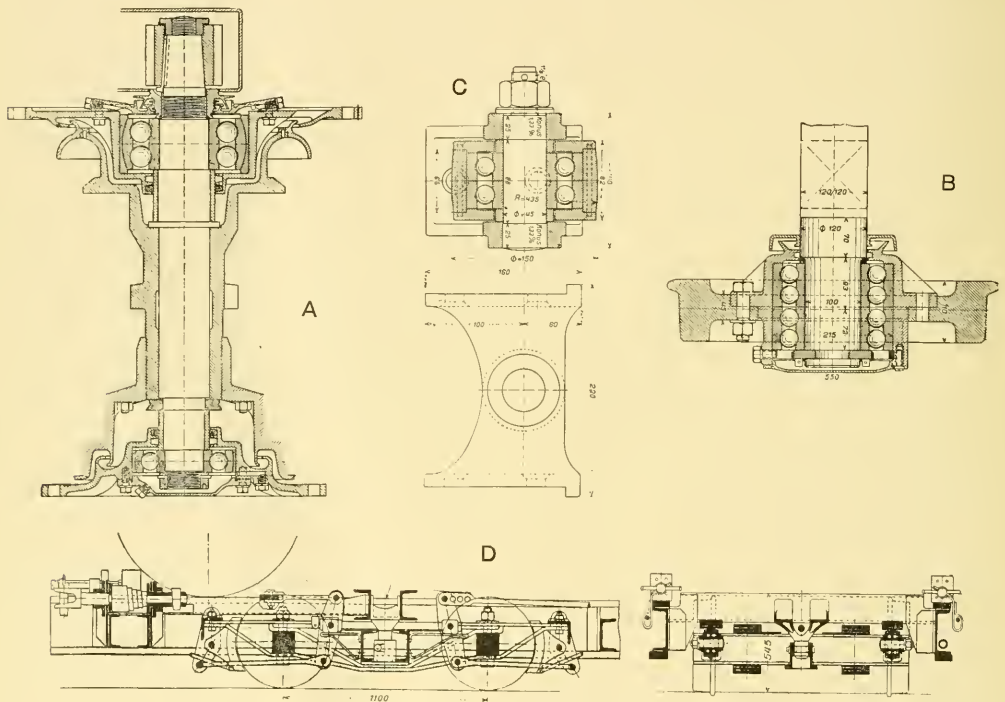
BALL BEARINGS ON ELECTRIC RAILWAY CARS
